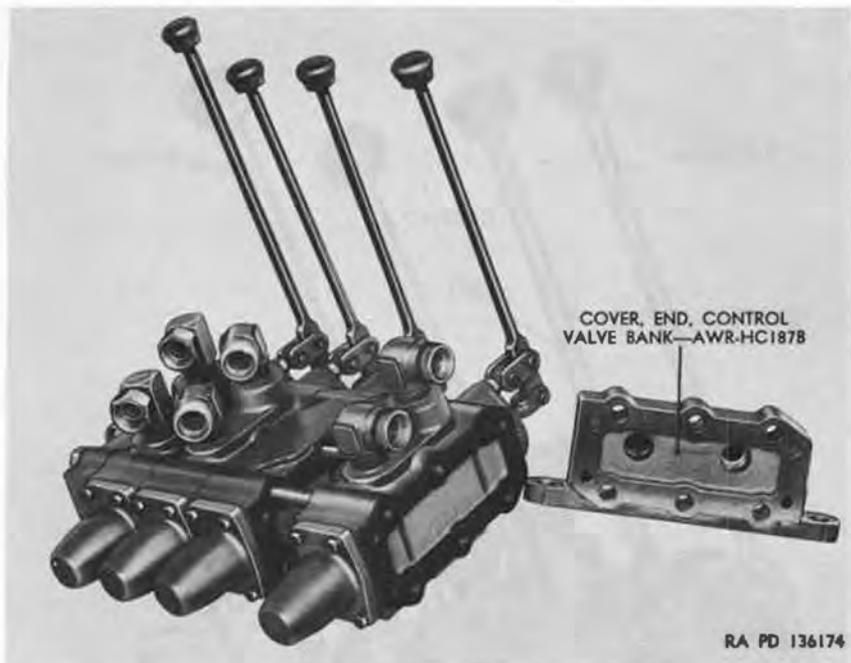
Control valve bank end cover separated from control valve bank assembly.
